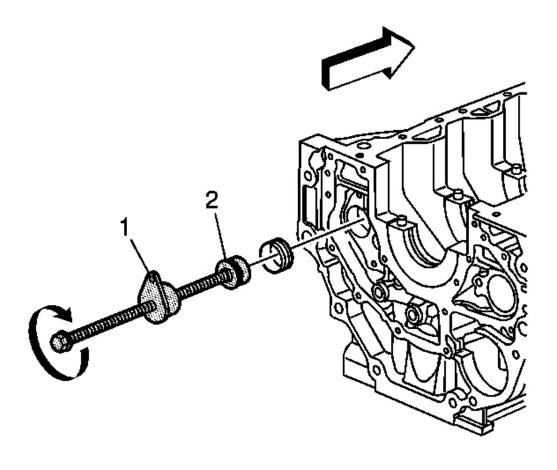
Installing Right Balance Shaft Bearing Courtesy of GENERAL MOTORS CORP.
